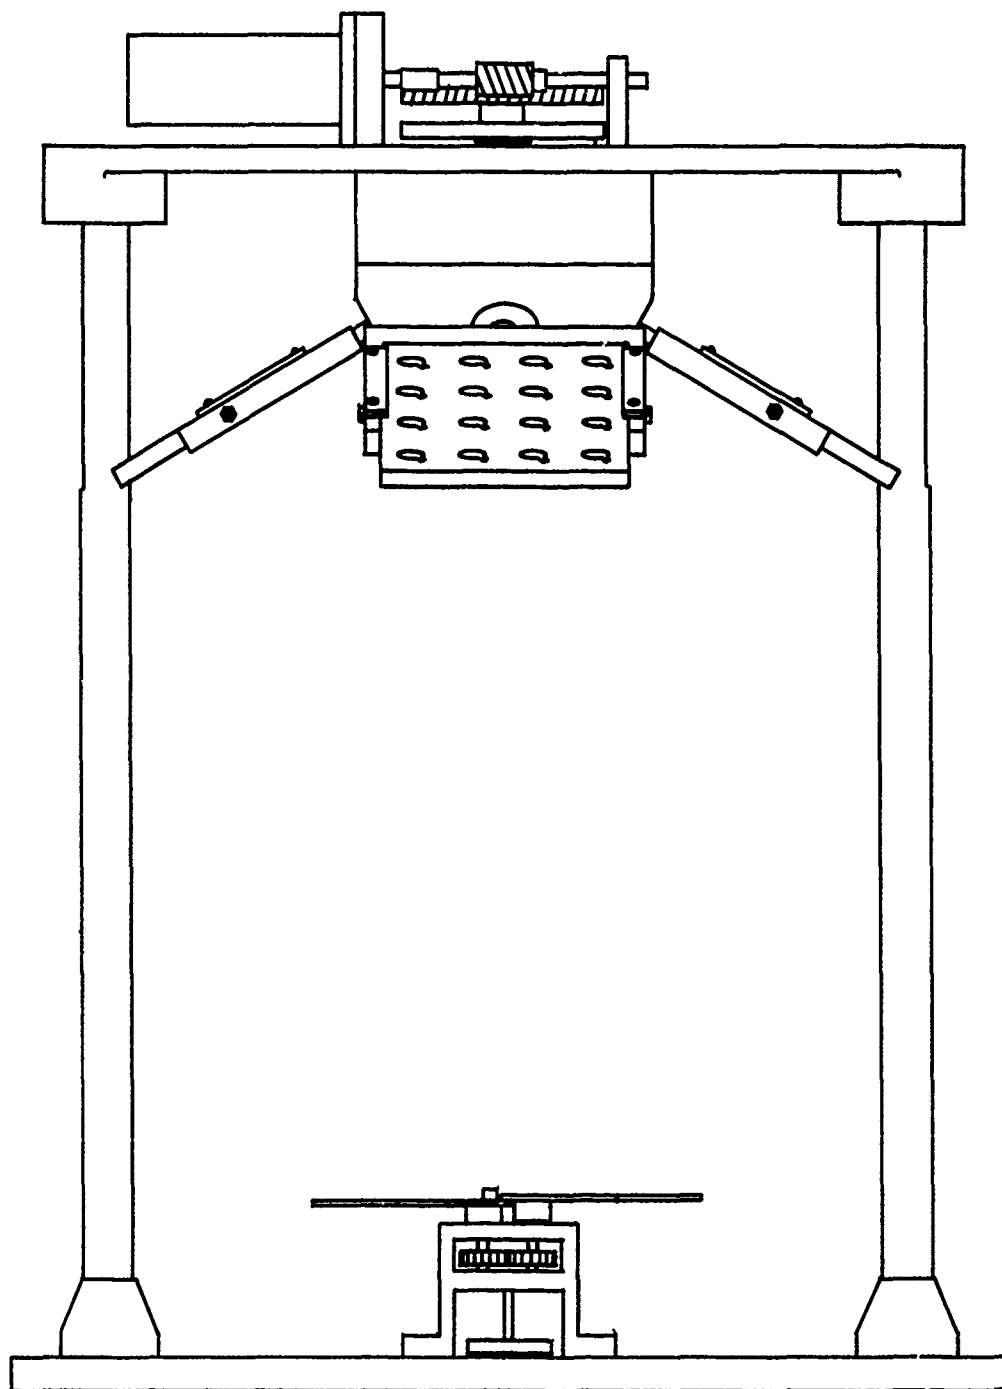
COMPENSATED FIXTURE ASSEMBLY
